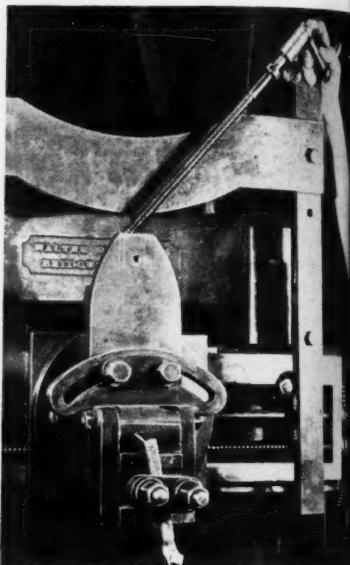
To assemble the attachment to the planer tool slide, the adjusting screw must be removed.
